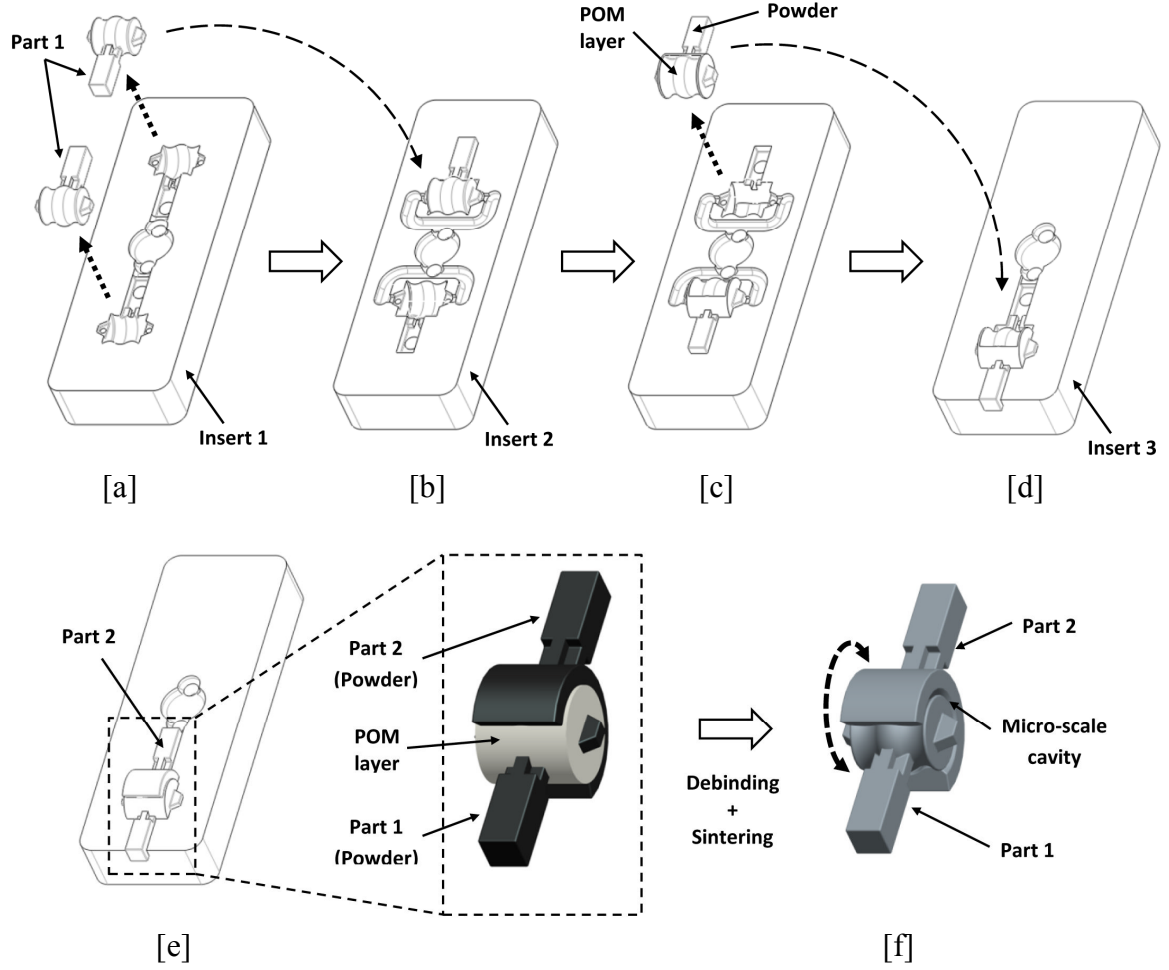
A schematic diagram of the moulding process of a hybrid structure: (a) two pieces of Part 1 are moulded of 316L and ejected from insert 1. (b) Part 1 pieces are placed in the cavities of insert 2. (c) Part 1 pieces are overmoulded by 200-micron layers of POM and ejected. (d) One overmoulded structure is placed in the cavity of insert 3 ready for the second overmoulding step. (e) In the second overmoulding stage, Part 2 is moulded of 316L, resulting in a hybrid structure of Part 1, POM layer and Part 2. (f) After debinding and sintering, Part 2 is movable relative to Part 1.
